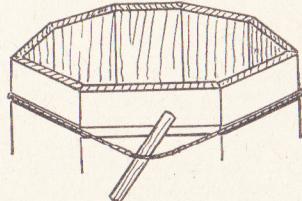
Holding the staves after gluing ferred. In fact the whole could be left in the plain wood, but it soon soils, and some finish is to be preferred.
